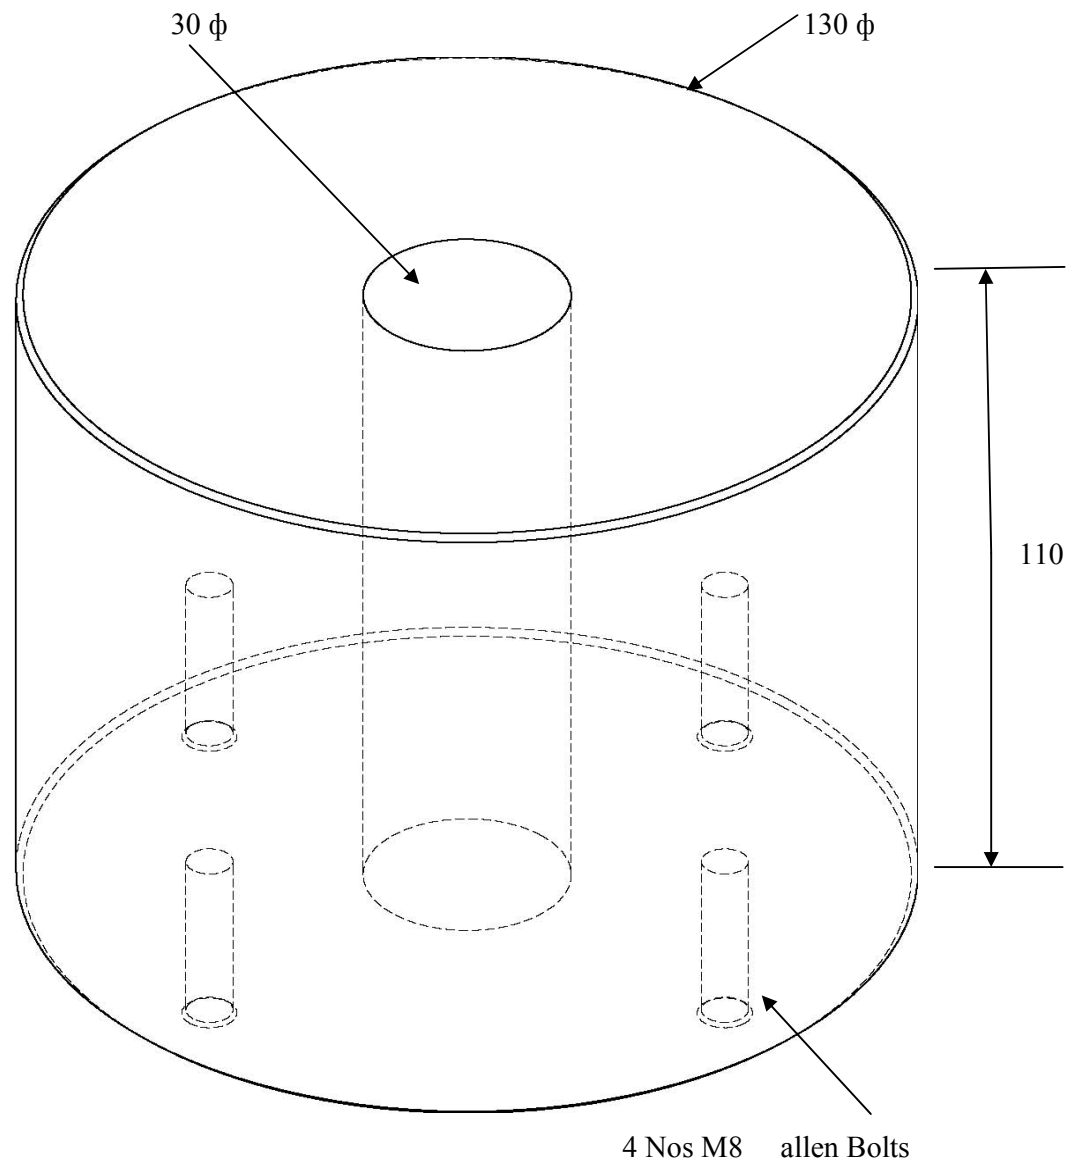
(b) Dimension of the Container with round extrusion chamber
